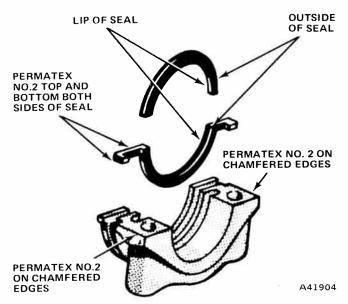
A-35 Rear Main Oil Seal and Cap Installation
